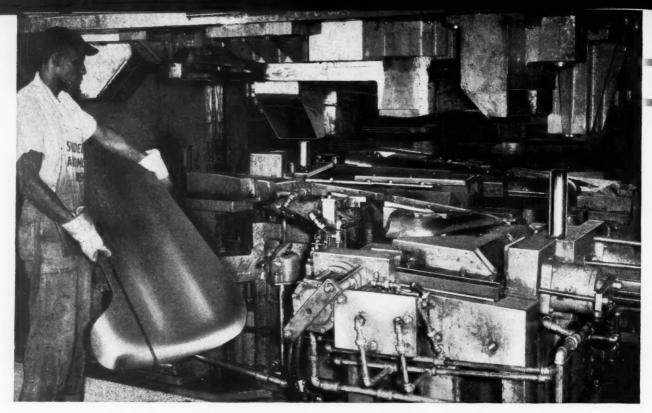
Two cam-actuated collapsible dies are mounted on a 500-ton mechanical press for simultaneously flanging both the left- and right-hand fenders
